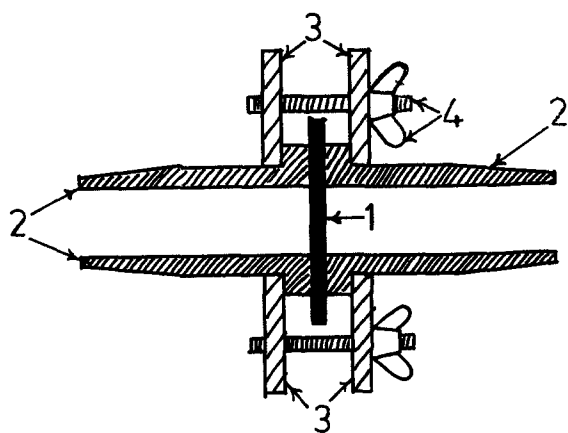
Mounting arrangement. (1) Steel membrane, (2) Teflon bushings, (3) steel frame, and (4) steel nuts and bolts.
